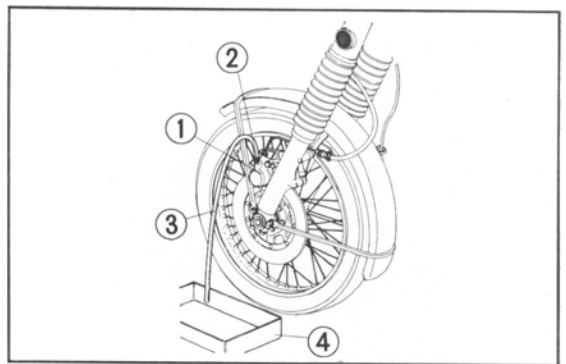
① Caliper ② Bleeder ③ Bleeder hose ④ Vessel
